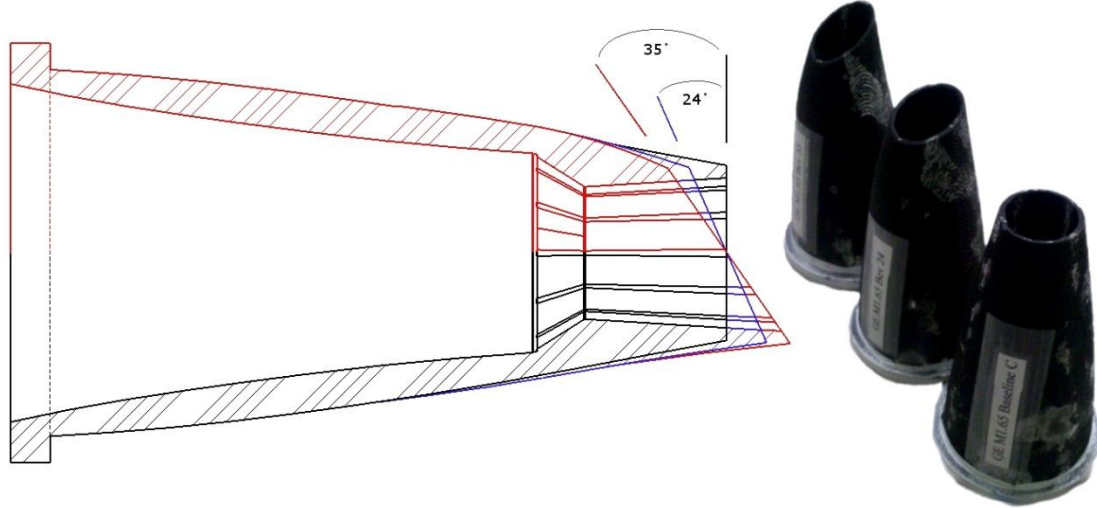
The Beveled Nozzles – Left: 2-D Cross-Sectional Drawing; Right: Image of Rapid Prototyped Nozzles
